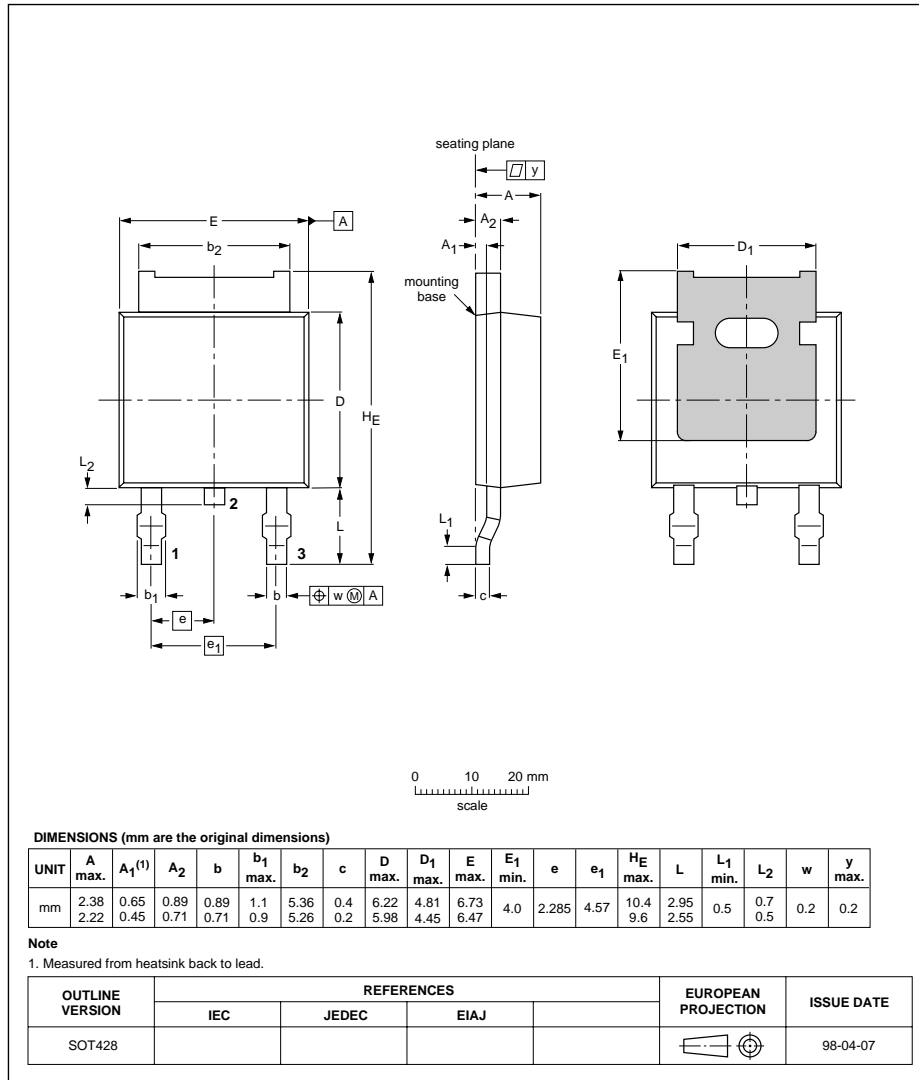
SOT428 surface mounting package. Centre pin connected to mounting base.
